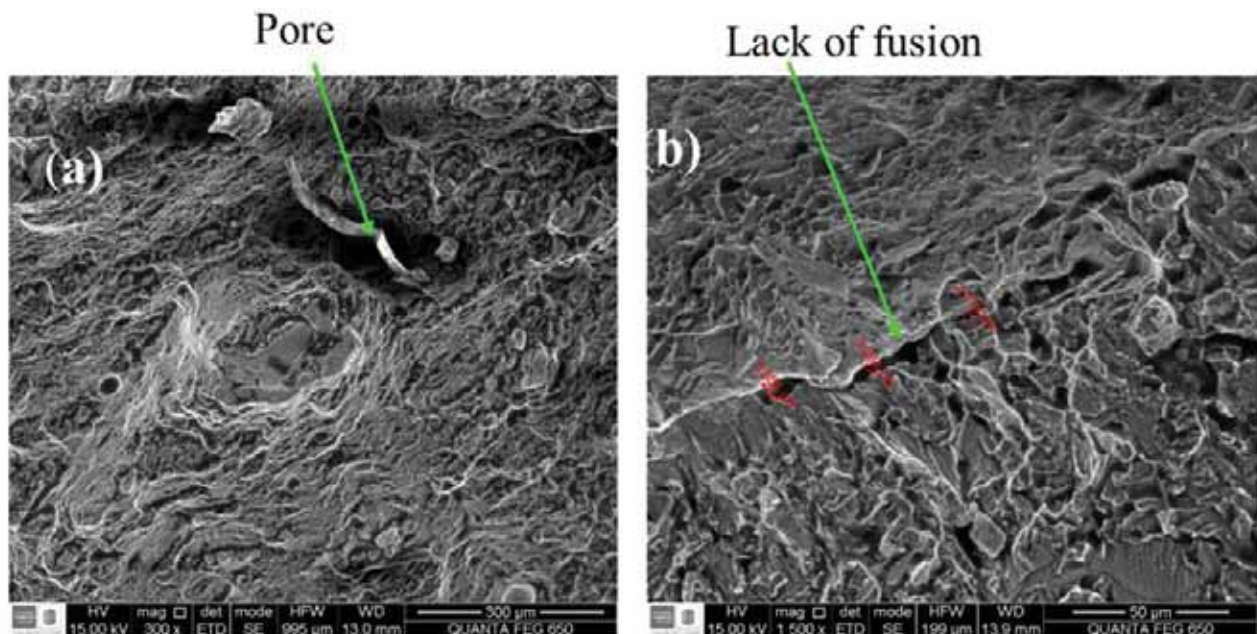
Fracture surface showing: (a) porosity defects; (b) lack of fusion.
